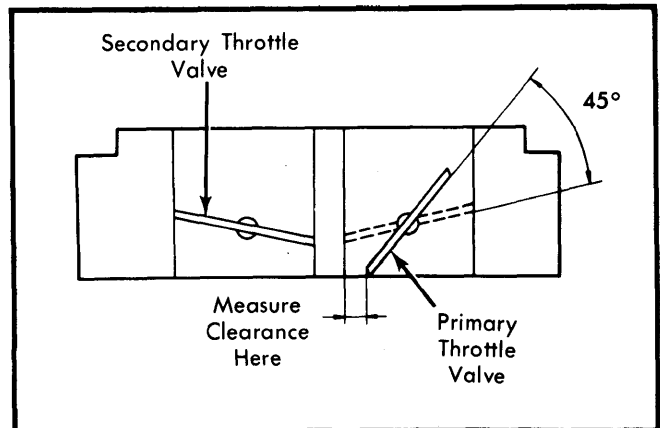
Adjusting Secondary Throttle Valve Opening Clearance
